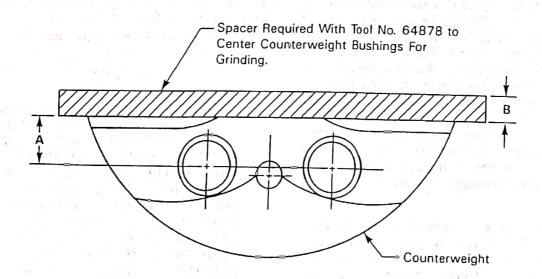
(Revised) Identification of Dimension "A" and "B" (From Supplement No. 2 to Service Instruction No. 1143B, included for reference purposes)
